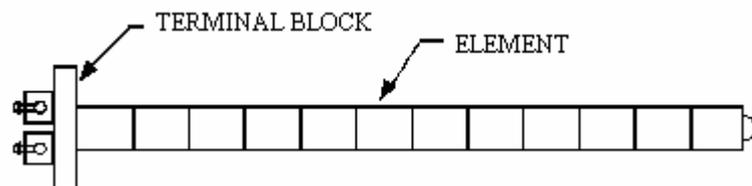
THERMOCOUPLE ELEMENT WITH TERMINAL BLOCK
